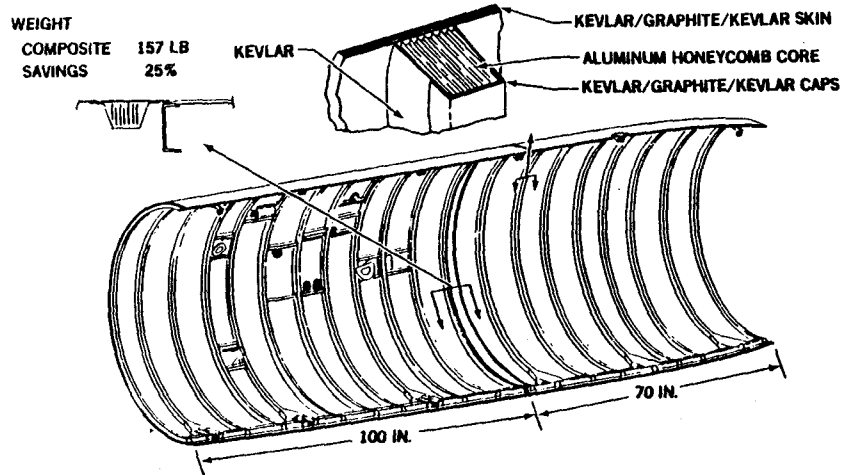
DC-9 Super 80 Lower Composite Access Doors
